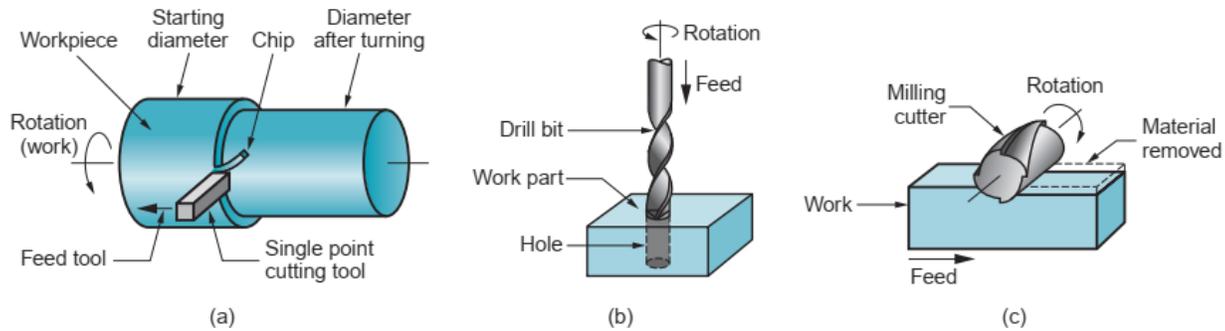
Common machining operations: (a) turning, in which a single-point cutting tool removes metal from a rotating workpiece to reduce its diameter; (b) drilling, in which a rotating drill bit is fed into the work to create a round hole; and (c) milling, in which a workpart is fed past a rotating cutter with multiple edges.
